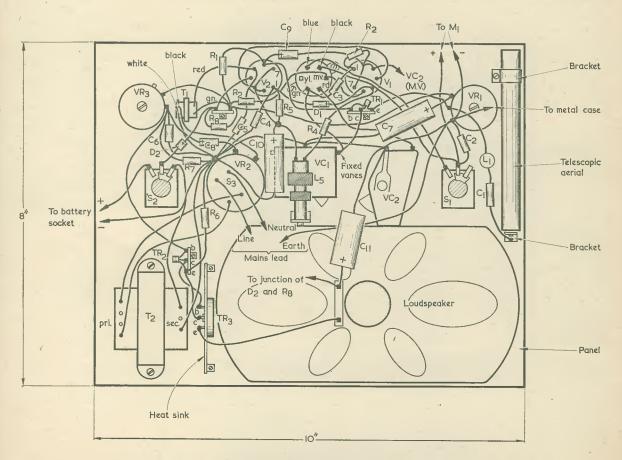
Component layout and wiring. The two valveholders are shown turned through 90° to illustrate the wiring to their tags
